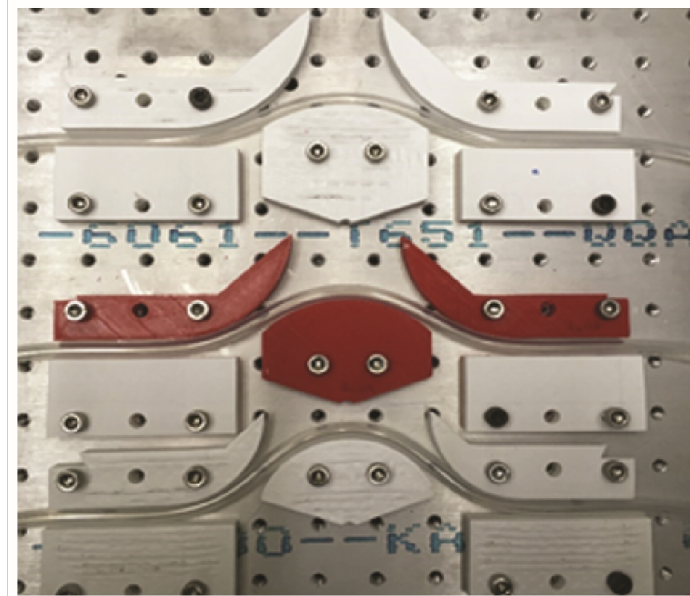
Thermoform mold and EVA tubes for different radii of curvature.
